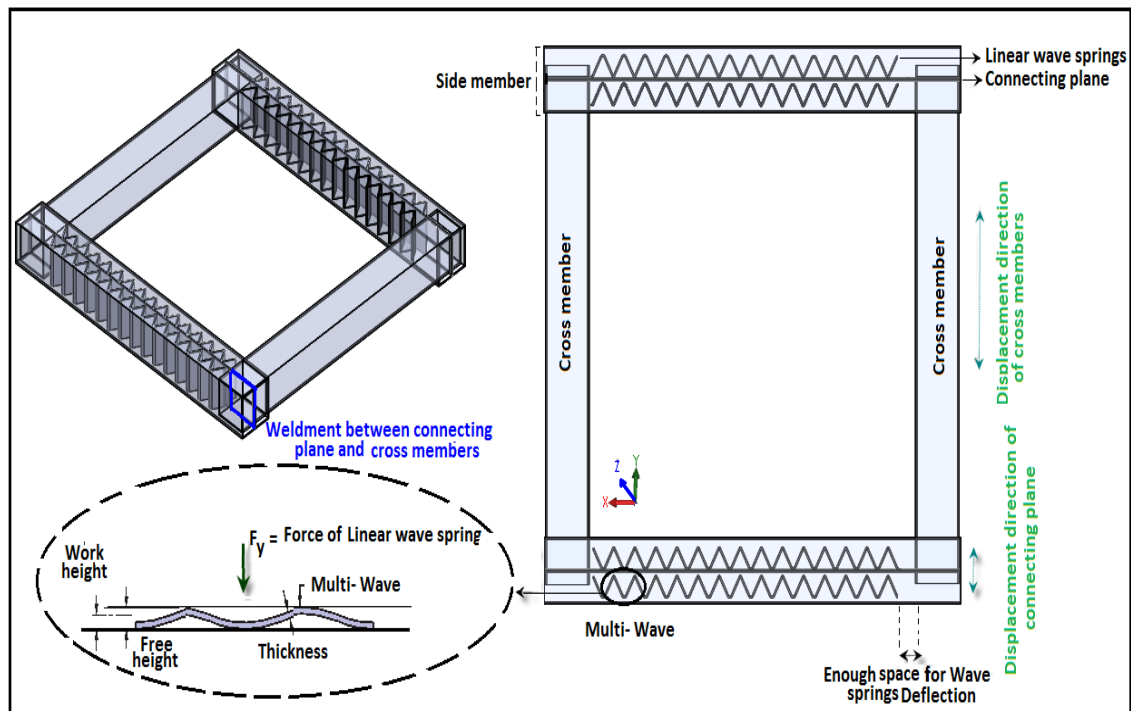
The structure of Ladder frame unit equipped with linear wave springs
